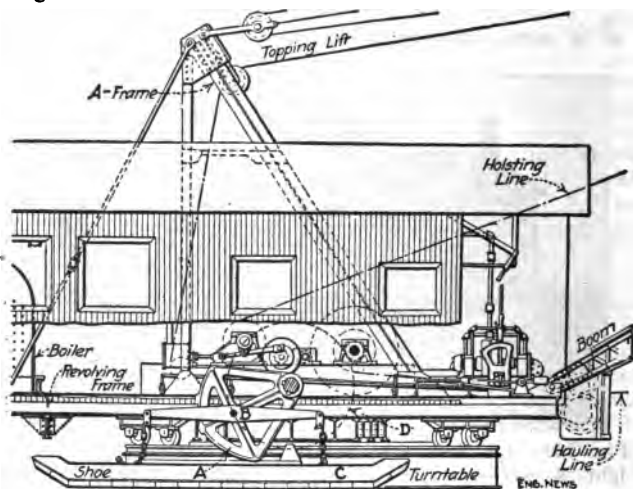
Walking Mechanism of Monighan Walking Excavator.
